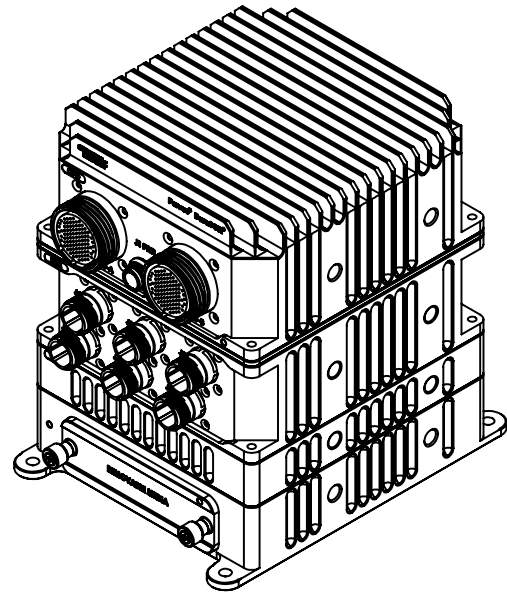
DuraCOR 8043 MCOTS unit dimensional line drawings (measurements shown are in inches and [cm])
